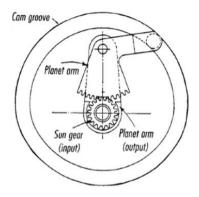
Planetary Gear-Cam mechanism with fixed cam [3]
